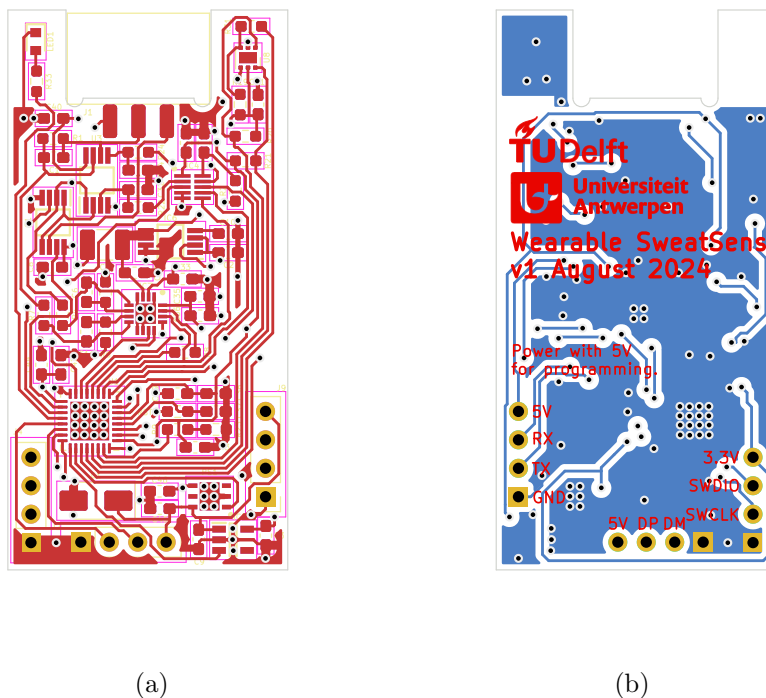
The wearable’s printed circuit board (PCB) design. In (a) the top part and in (b) the bottom part of the PCB.
